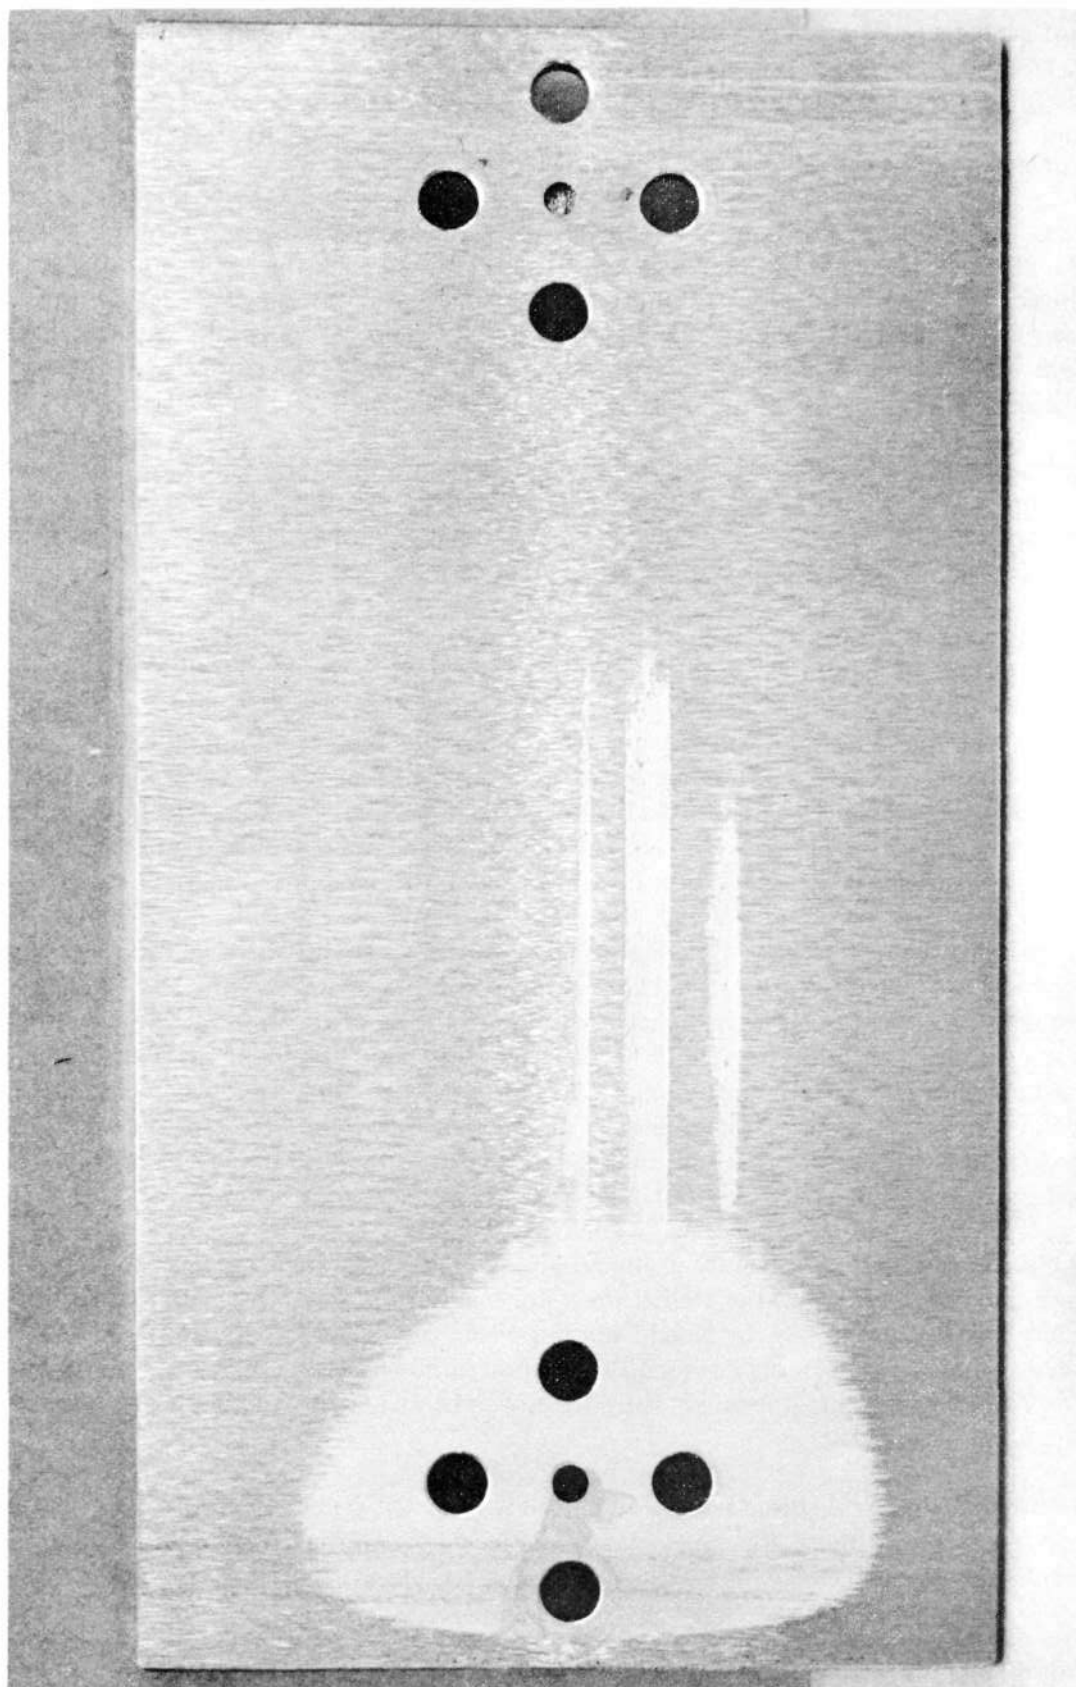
Typical Electroformed Plate After Initial Surface Grinding to Remove Edge Build-up
